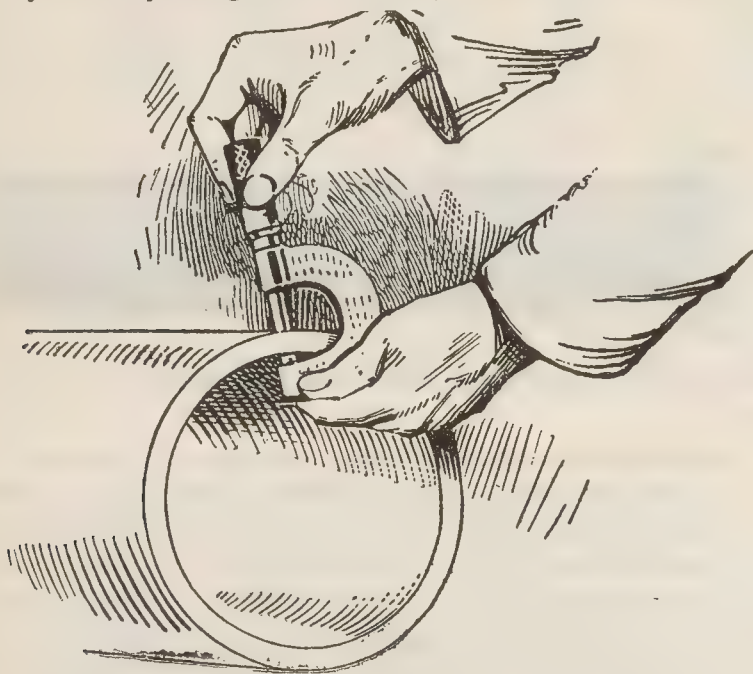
,068.—Gauging wall thickness of large hot drawn tube. Hot drawn tubing is extensively used in place of castings, forged parts and solid stock. The physical properties of the material and the relatively large diameters and range of wall thicknesses adapt it for such uses as formed axle housings, shaft casings, cylinders, columns and pistons of hydraulic and other apparatus, compressed air containers, retorts, gear ring blanks and for other purposes where hot finished or cold drawn tubing would be unsuitable because of limitation of size, gauge, and possible extra cost of the latter class of materials in large quantities. Hot drawn material will stand an unusual amount of manipulating, such as expanding, swaging, upsetting and flanging.
